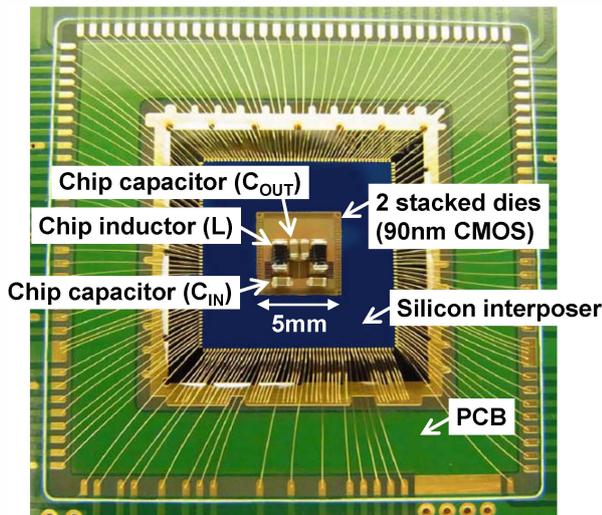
Photograph of assembled system on a PCB board. Chip inductor and chip capacitor are mounted directly on top of stacked dies at the center of the photo.
